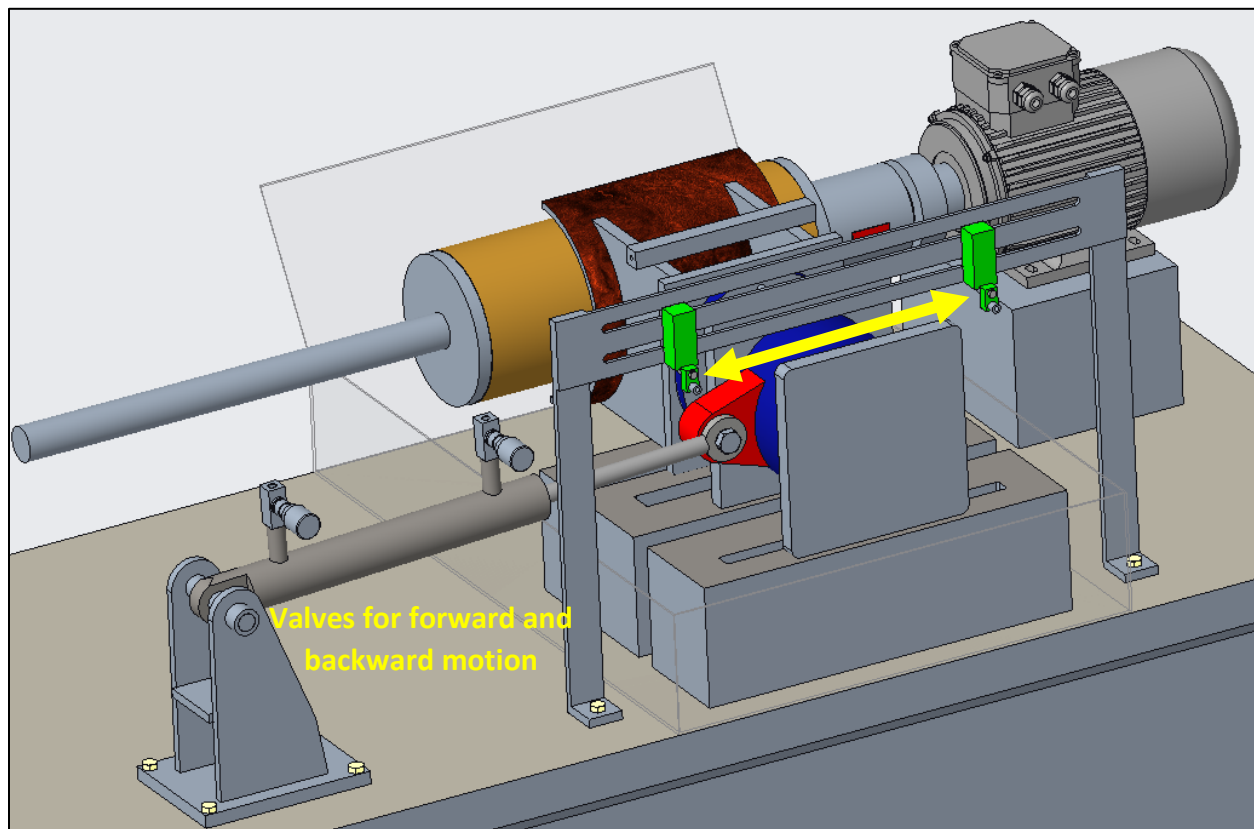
6 - Hydraulic unit attached to the casing piston for axial movement
